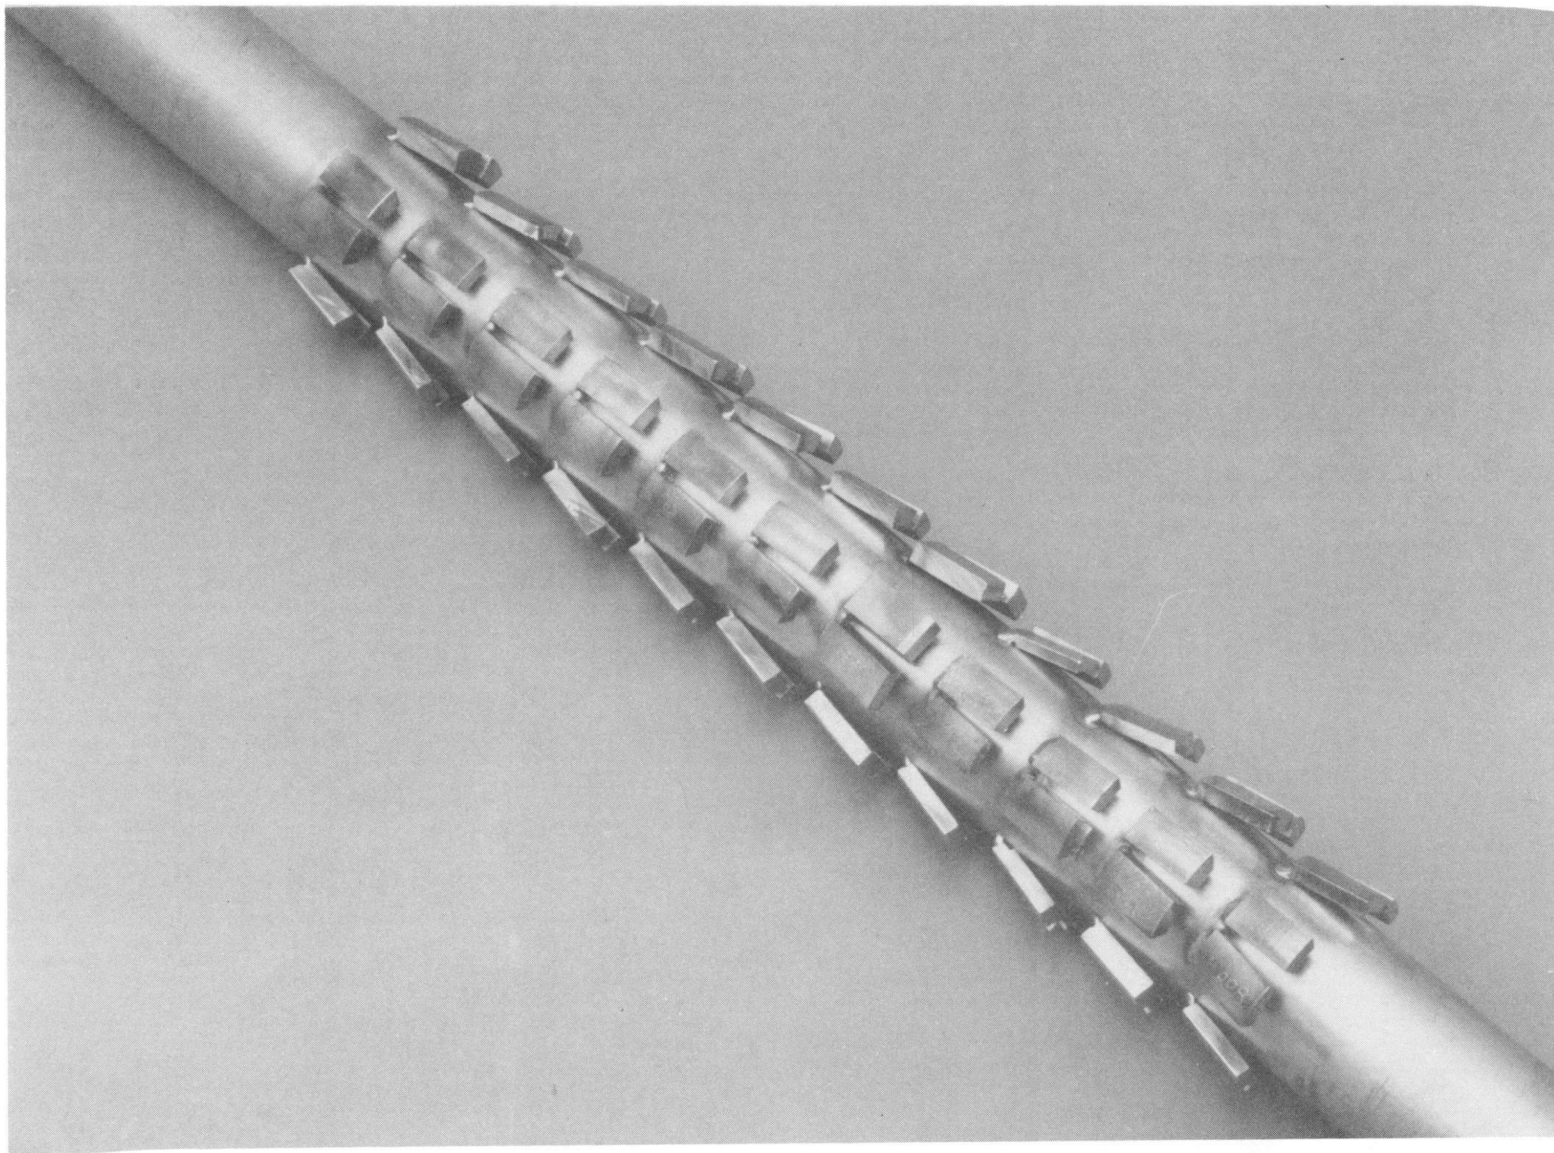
Typical Hanger Material (Uncooled) Specimen Probe
